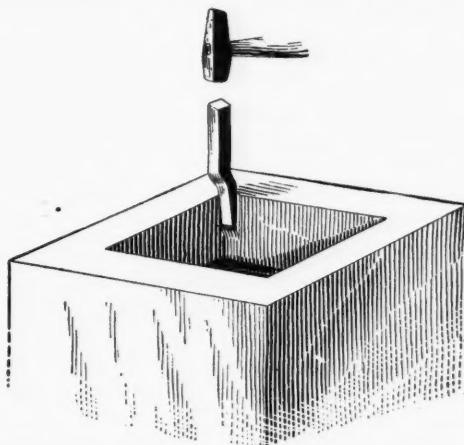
HOW CHISEL SHOWN IN FIG. 27 IS USED
